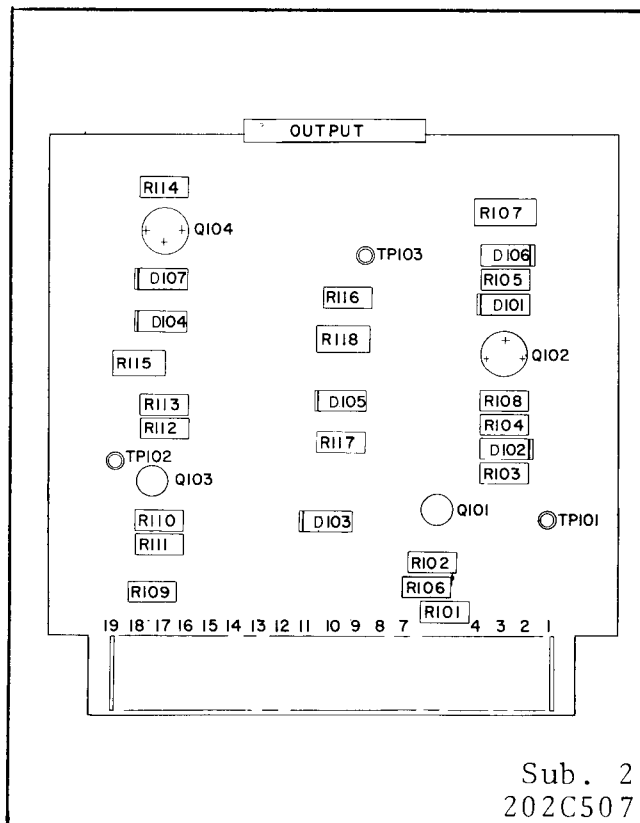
Component locations on the amplifier and limiter printed circuit board.
